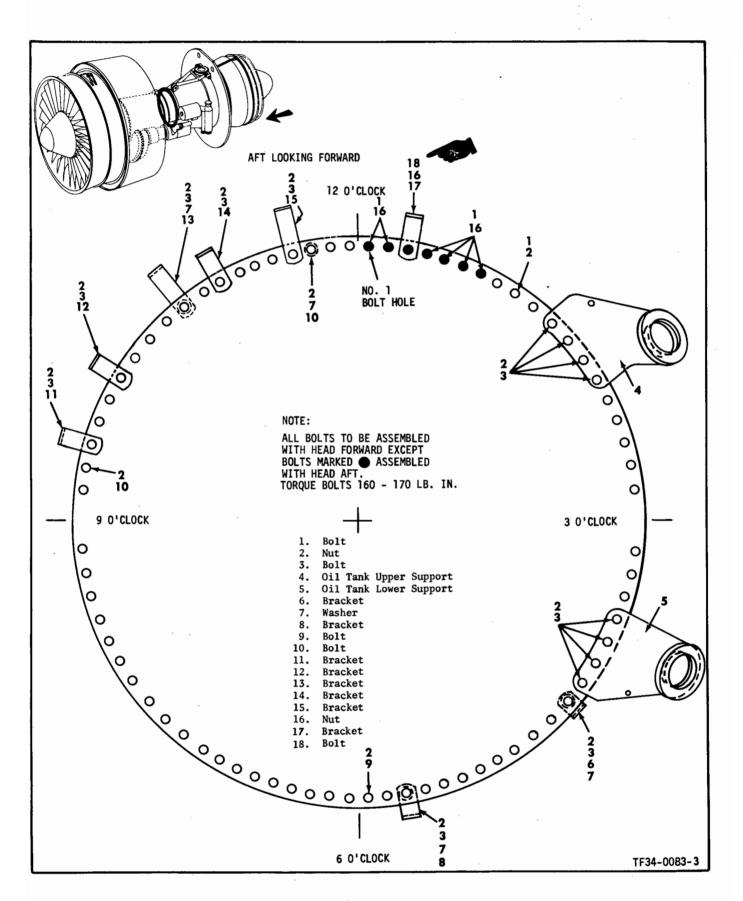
Bolting Diagram - Compressor Casing-to-Combustion Chamber
